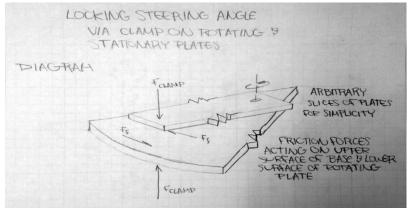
Hand sketch diagram illustrating the plate clamp concept for locking the steering angle
